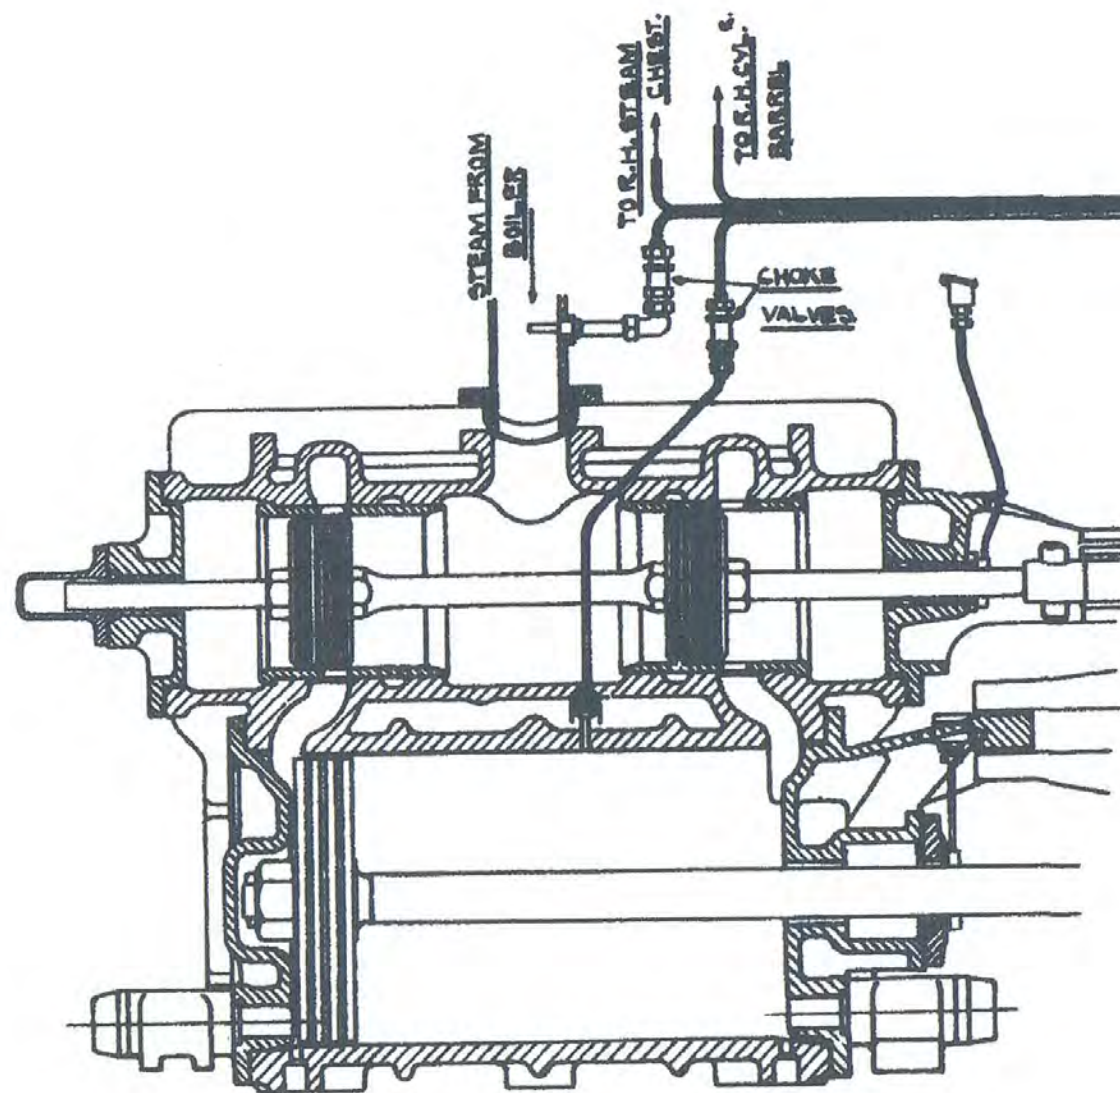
SECTION THROUGH LOCOMOTIVE CYLINDER AND STEAMCHEST, SHOWING ARRANGEMENT OF ATOMISER LUBRICATION SYSTEM, L.M.S.R.
